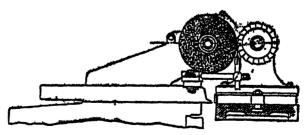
SHARPENING A MILLING CUTTER ON A UNI-VERSAL GRINDER
